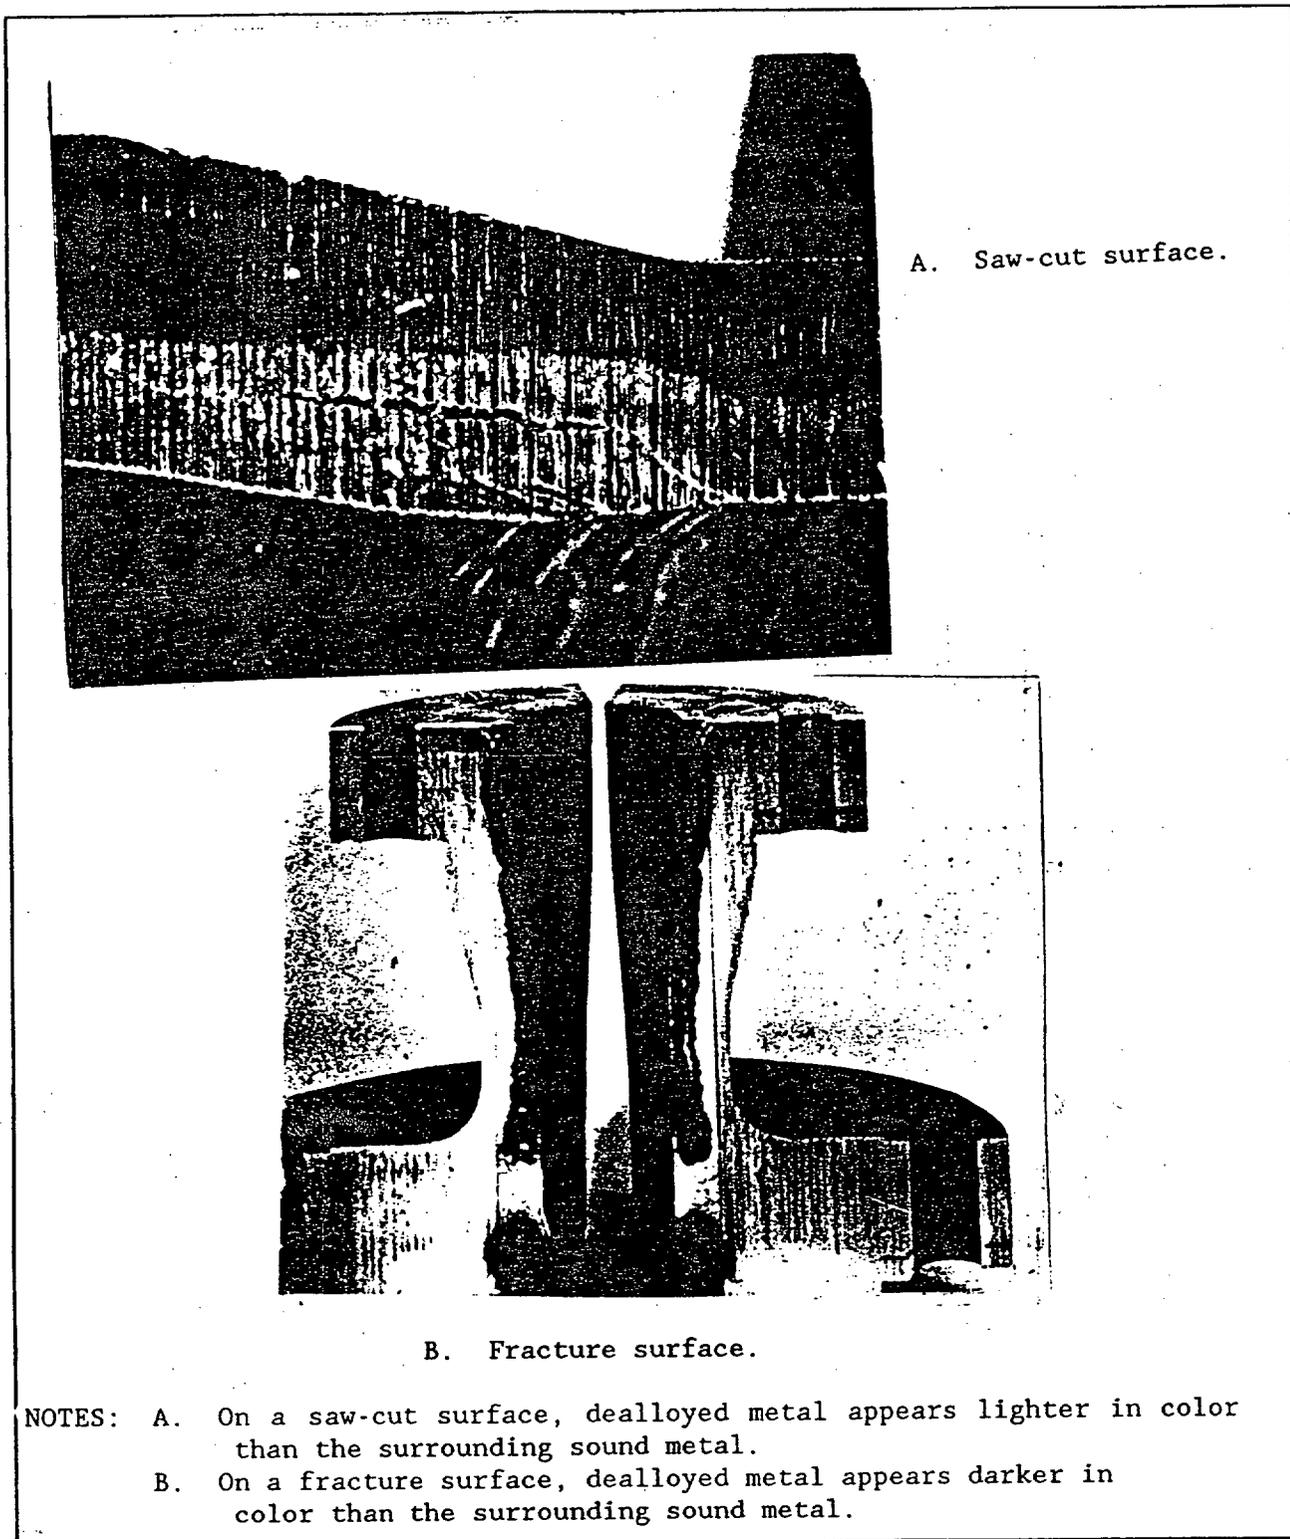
Appearance of dealloying on saw-cut and fracture surfaces of an aluminum bronze valve tailpiece.
